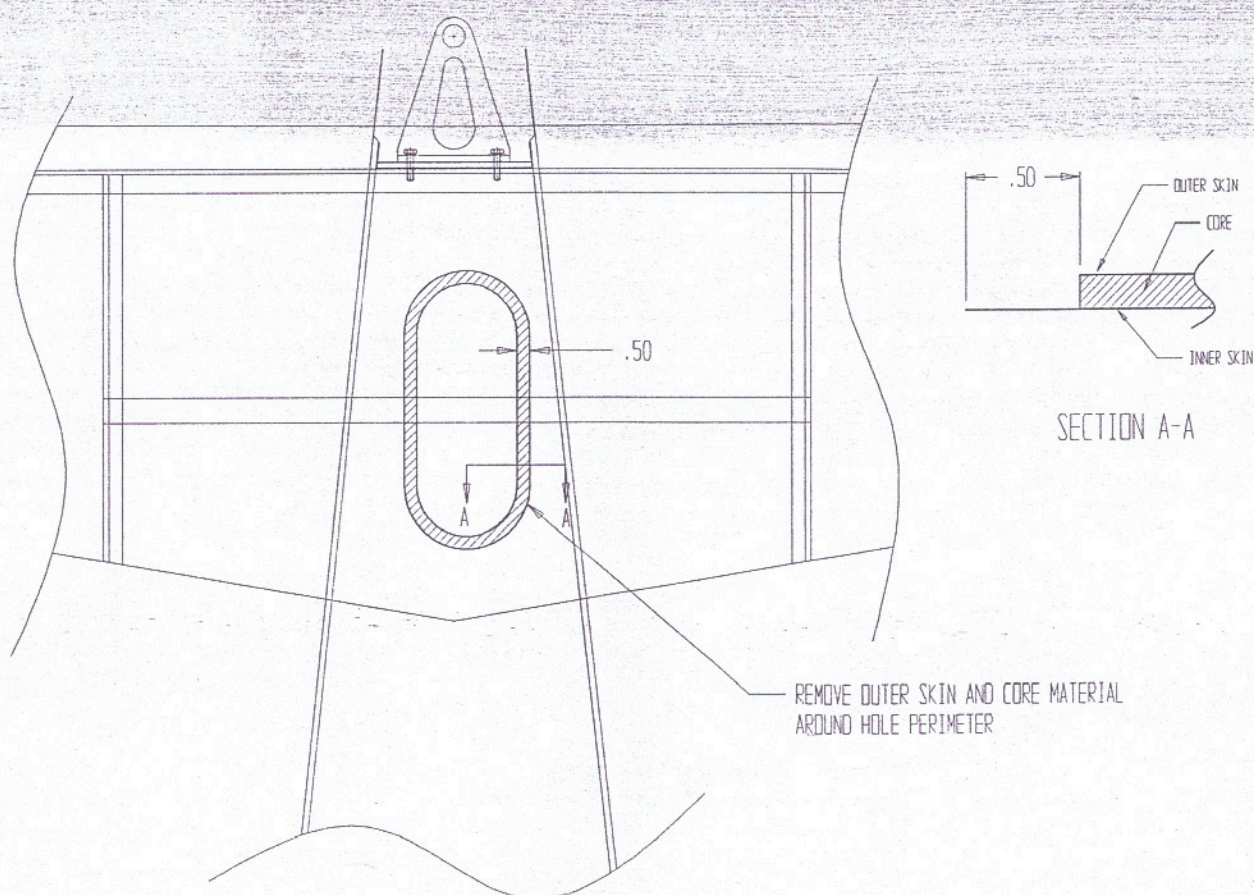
Area to cut out for stab skin patch, left, and patch edge preparation, right.
